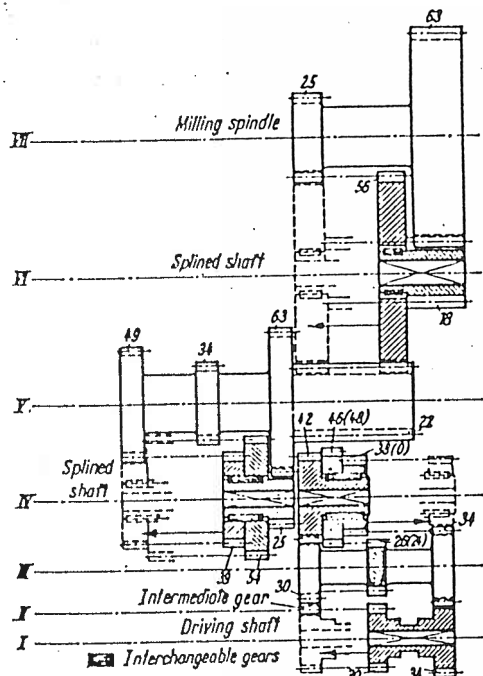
Milling spindle drive for 12 or 18 spindle speeds.
